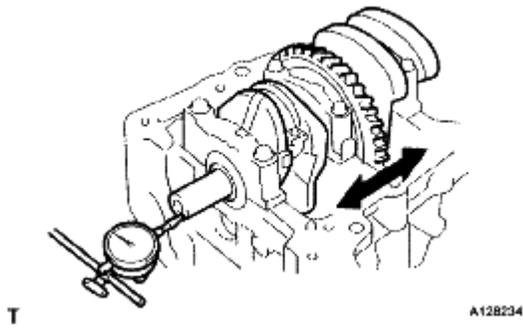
Inspecting Crankshaft Thrust Clearance
